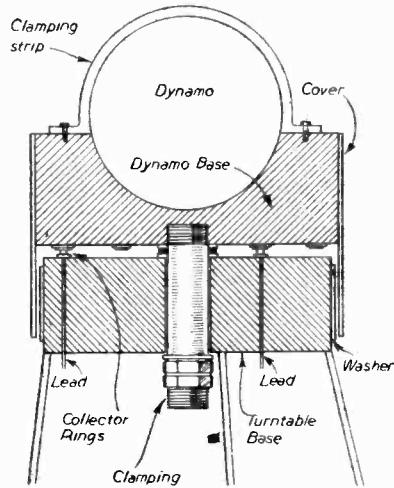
Sectional view of the turntable, showing the dynamo fixing clamp.
